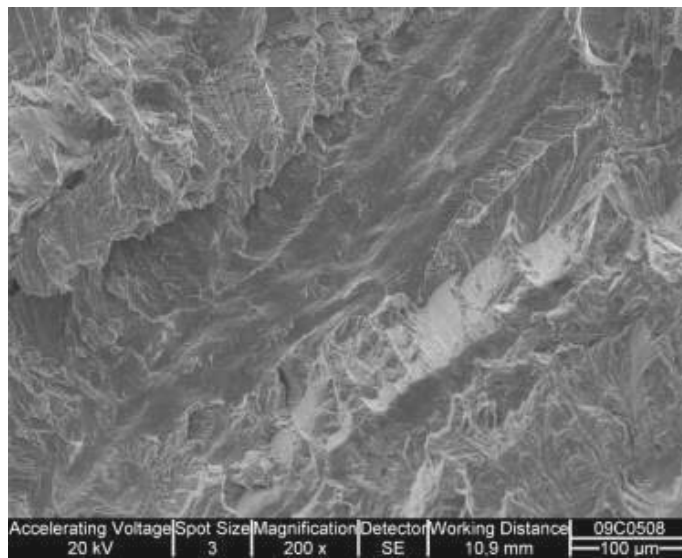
SEM image of the fracture surface of Alloy 82 after a J-R test performed in hydrogenated low temperature water ($100 \text{ cm}^3 \text{ H}_2/\text{kg H}_2\text{O}$, specimen B3). The fracture surface consists of mainly IG/ID cracking. The areas up left and down right represent fatigue cracking before and after the test, respectively.
